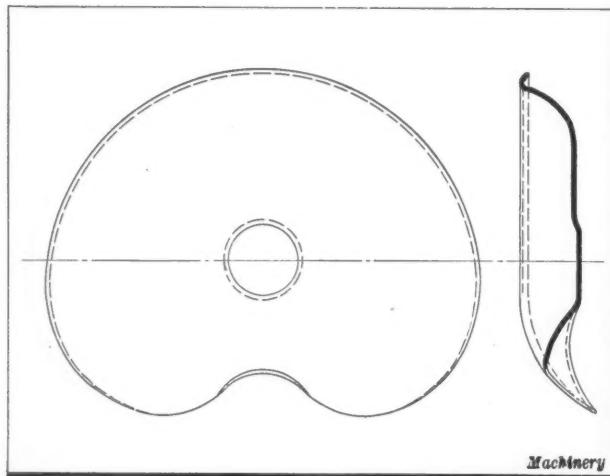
Seat provided for the Driver on Many Types of Agricultural Machinery
